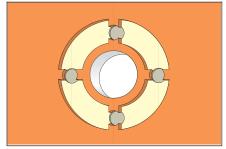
Mill adjacent to the plated hole to sever spoke connections.
